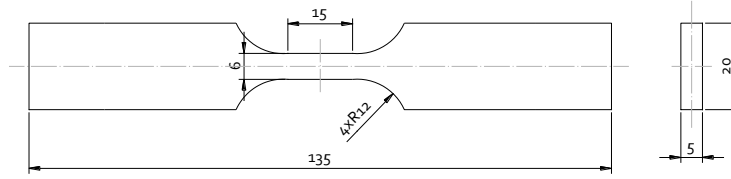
Smooth plane fatigue specimen (S235 steel) (dimension in mm).
